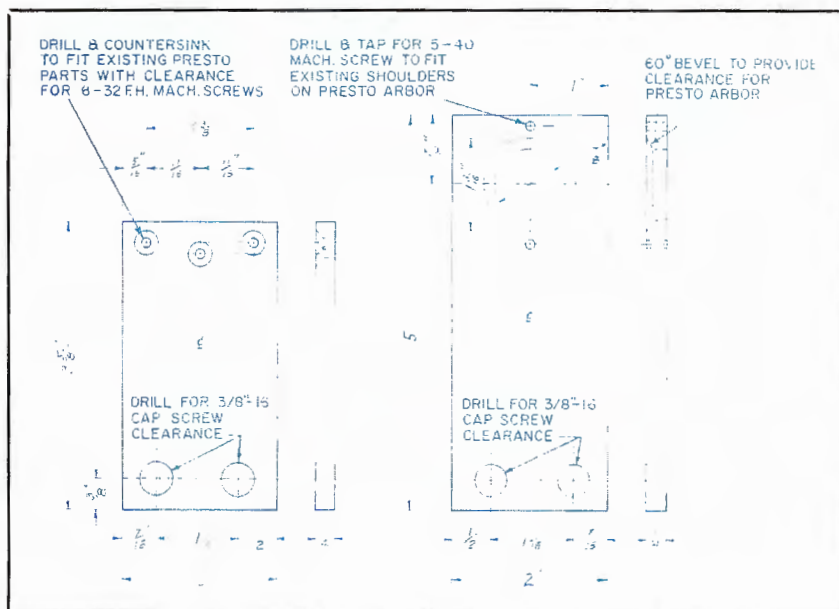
Dimensional plan view drawings of the inboard and outboard support brackets.
